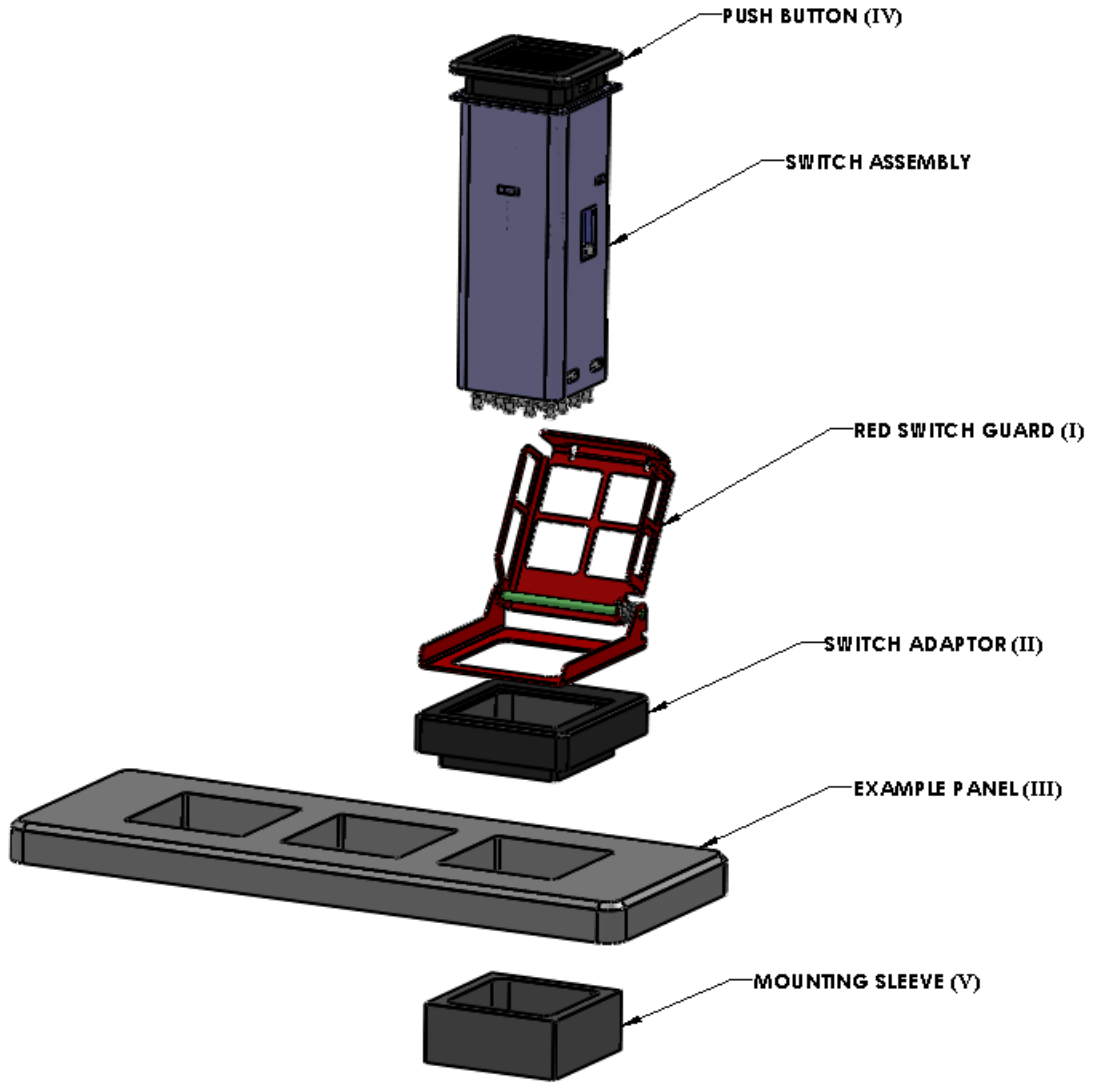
EXPLODED VIEW FOR -001, -002, AND -003 CONFIGURATIONS
